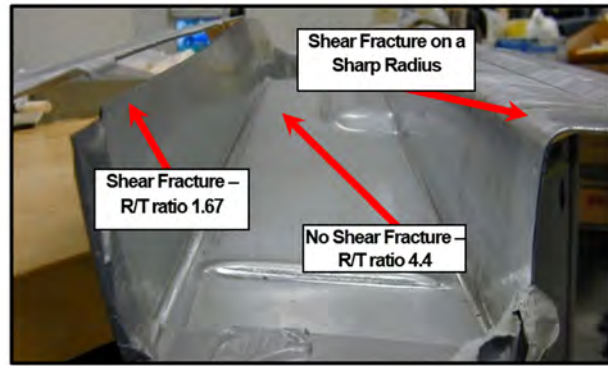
B-26: Side view of the same part showing shear fracture on the left side of the part where the R/T ratio was 1.67. The right side of the same part with the same depth of draw, draw bead configuration, and restraining force had no shear fracture and had an R/T ratio of 4.4. ^{M-7}
